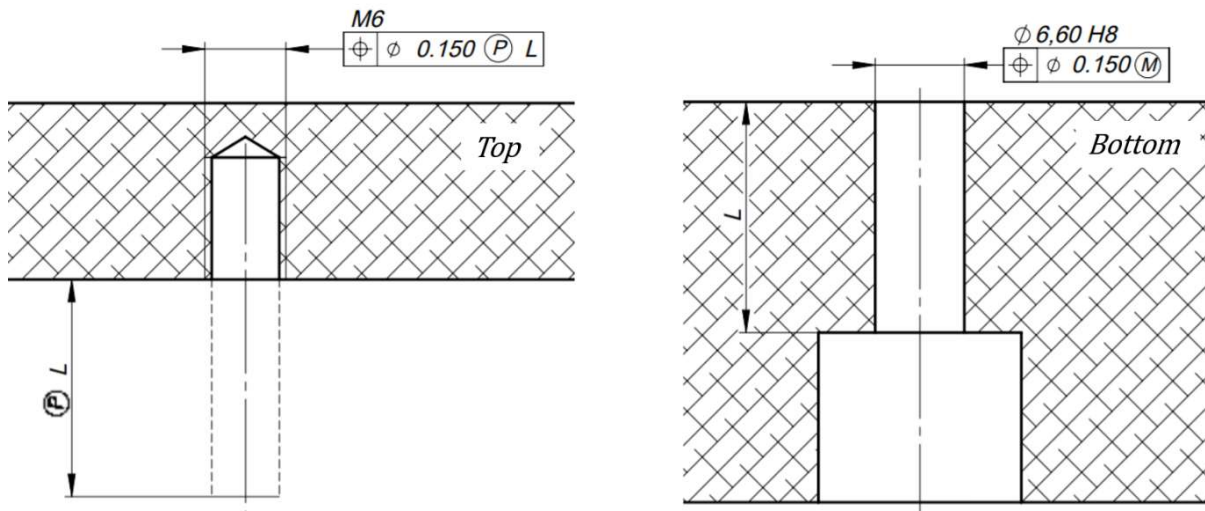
Bolted Connection Hole's Geometric Tolerancing
